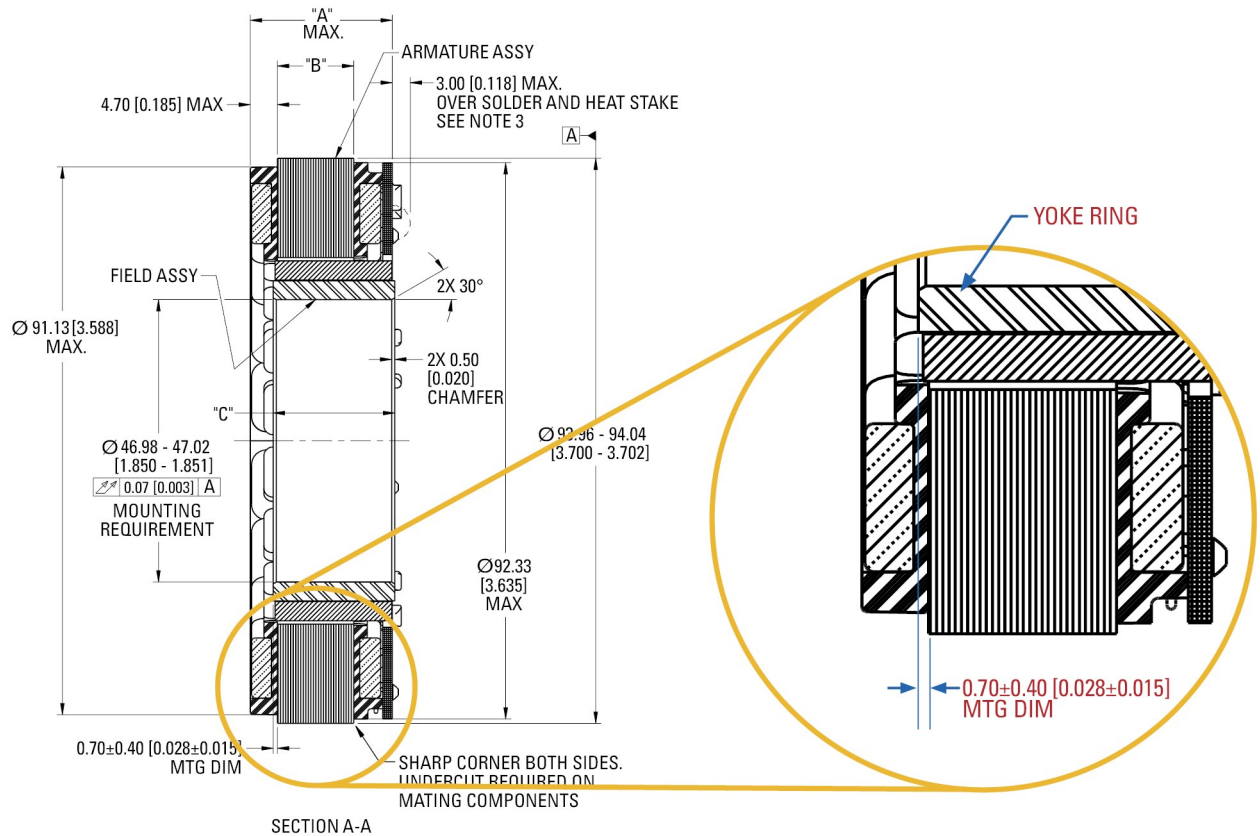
Illustration of mounting dimension displayed on a TBM2G-068XXX-XXXX-00 Outline. This dimension is measured from the left edge of the lamination stack to the left edge of the yoke material (not magnet).
